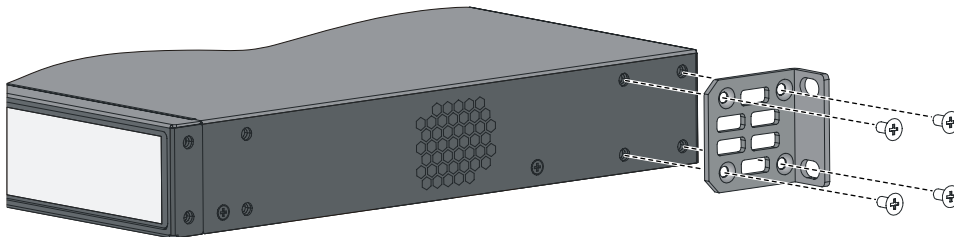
Install a four-holed mounting bracket on the chassis (rear mounting)
